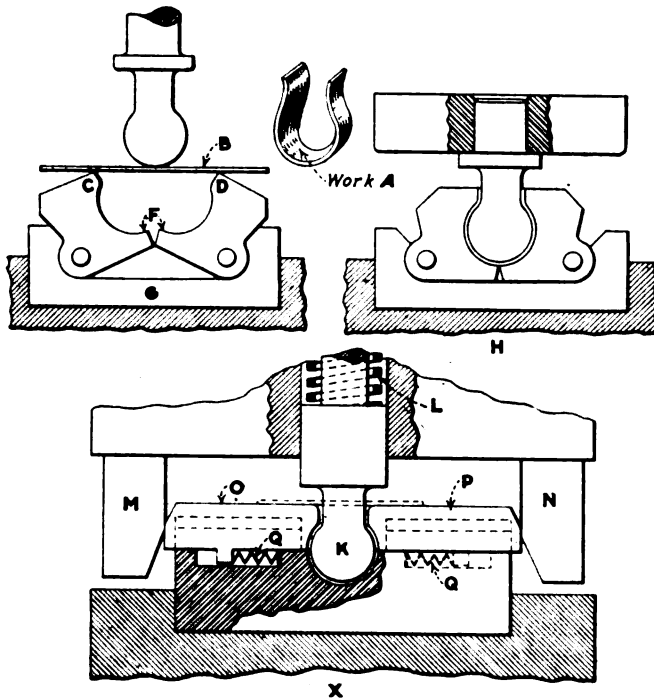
TWO EXAMPLES OF CLOSING-IN BENDING DIES shown in the closed position, and it can be seen that the work has been completely formed. As the punch withdraws, the two plates open up while the blank remains on the punch. It can be very readily removed from the punch and the next blank placed in position.
